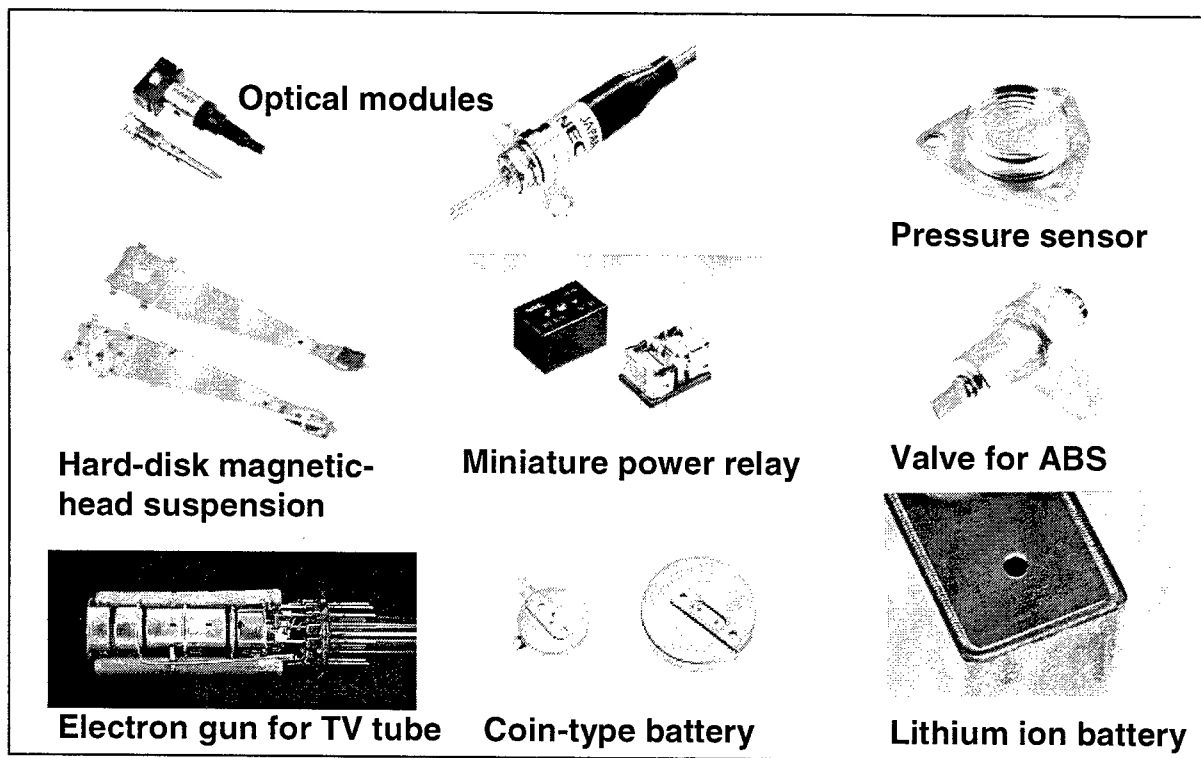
Several applications of laser micro-welding [Courtesy of NEC Corp].
